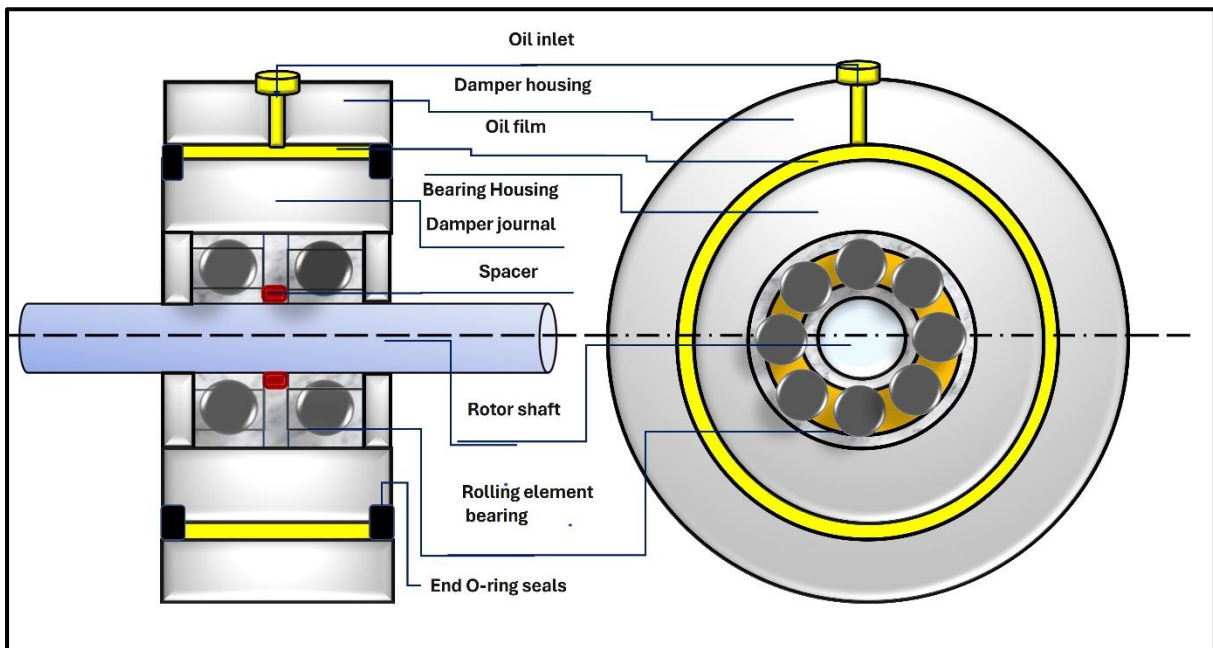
Details part of Squeeze film damper assembly with rolling element.
